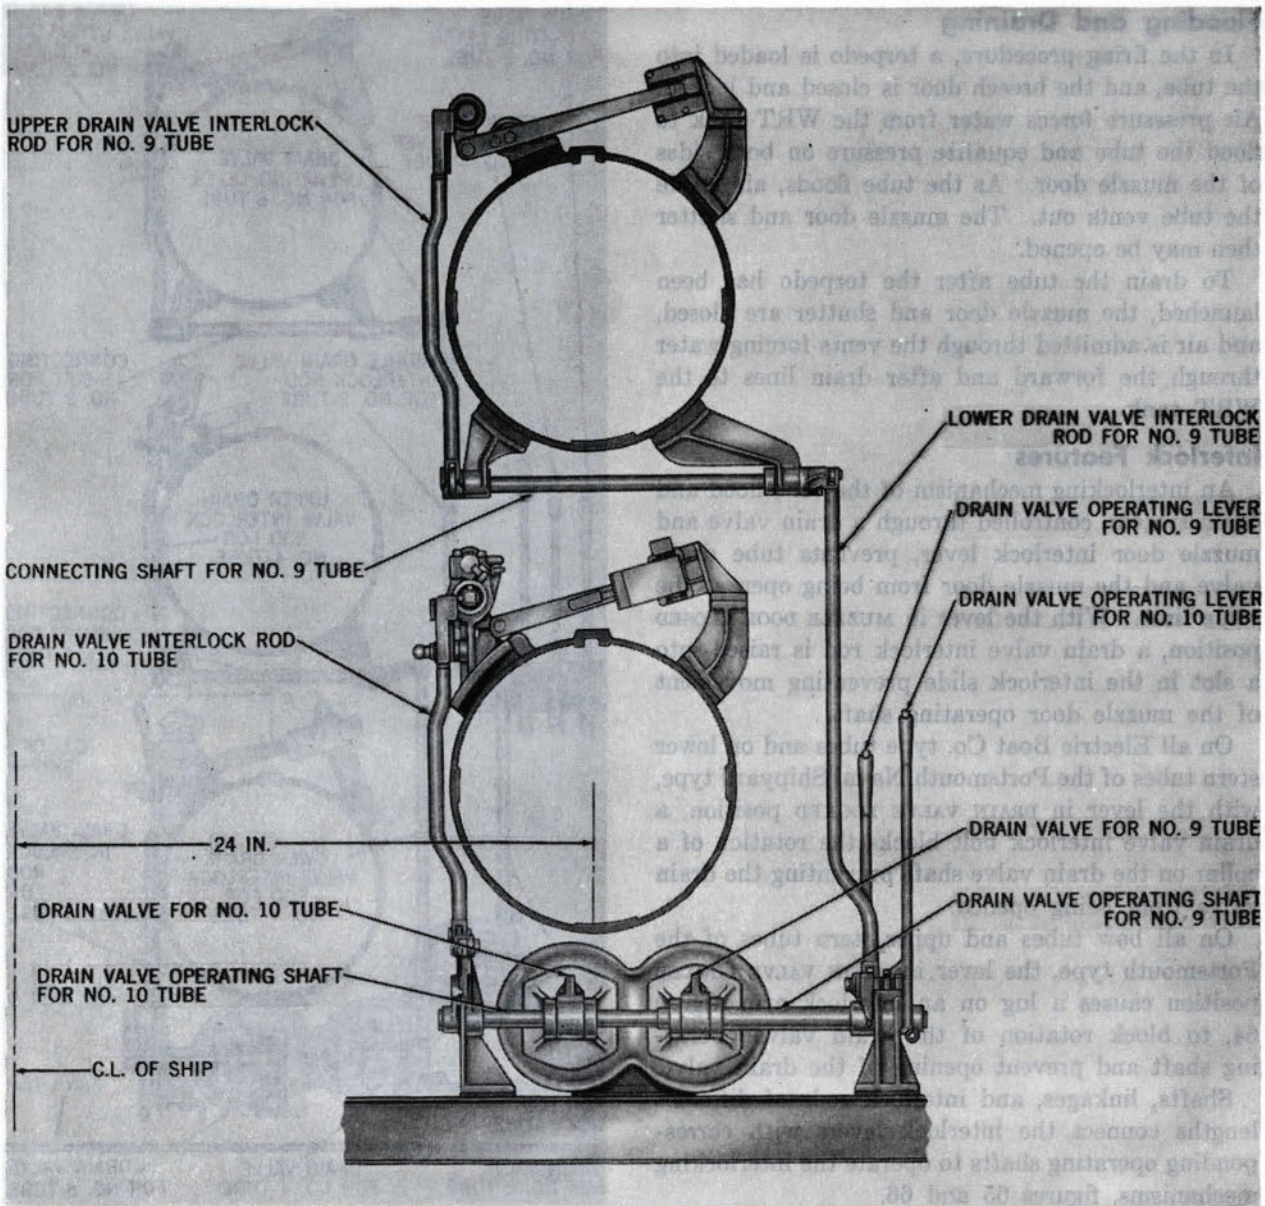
Drain Valve and Muzzle Door Interlocking Mechanisms—Portsmouth Type Stern Bank—Sectional View.
